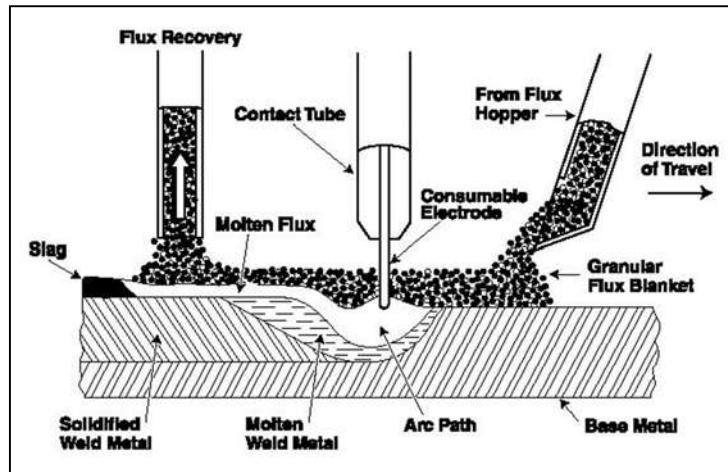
Submerged Arc Welding Process (SAW).
